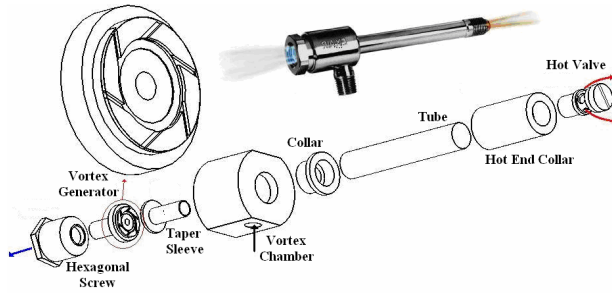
Exploded view of a commercial RHVT, showing all components and highlighting the vortex generator.
